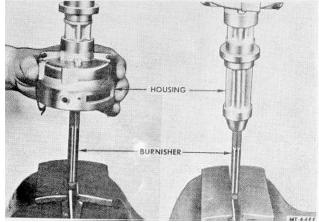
Burnishing Upper and Lower Bushings Using Burnisher SE-1955-2
